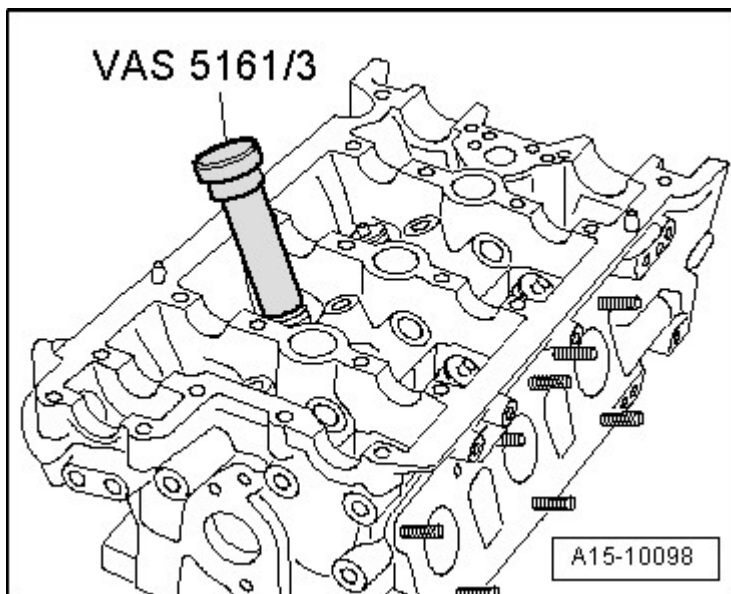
Placing Drift VAS 5161/3 On Valve Spring Plate And Loosening Stuck Valve Keepers Using Plastic Hammer
